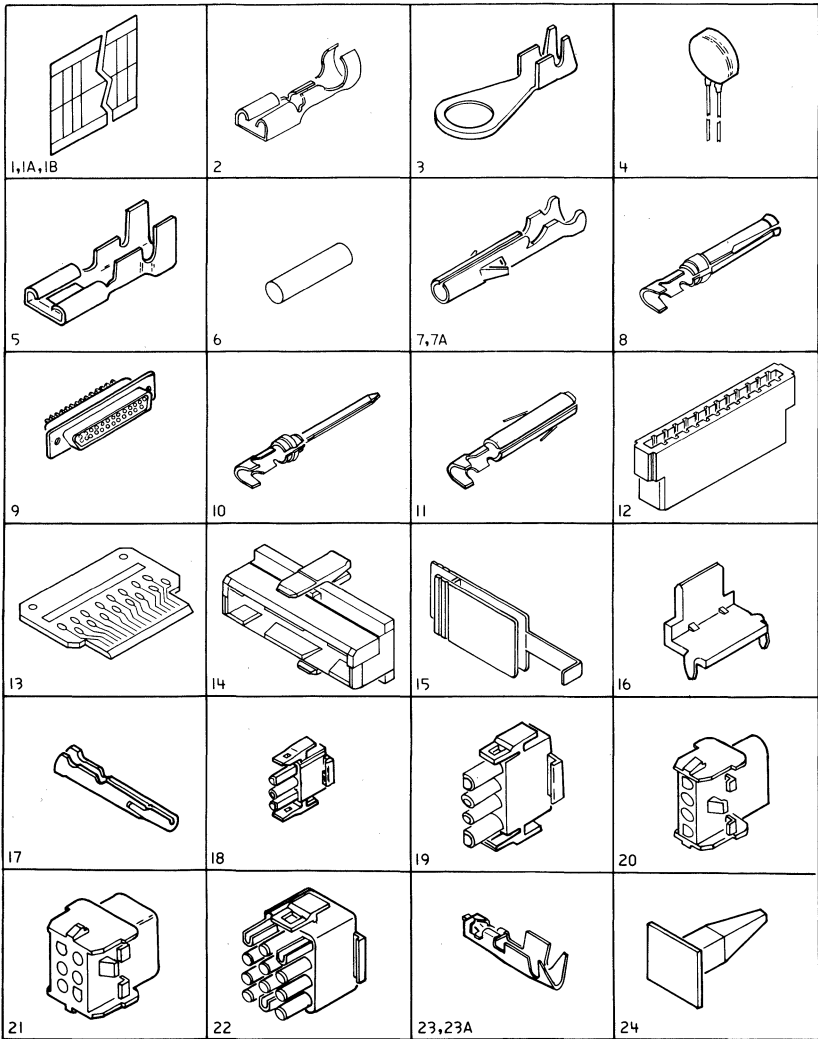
CABLE ASSEMBLIES AND COMPONENT PARTS (3 of 5)
